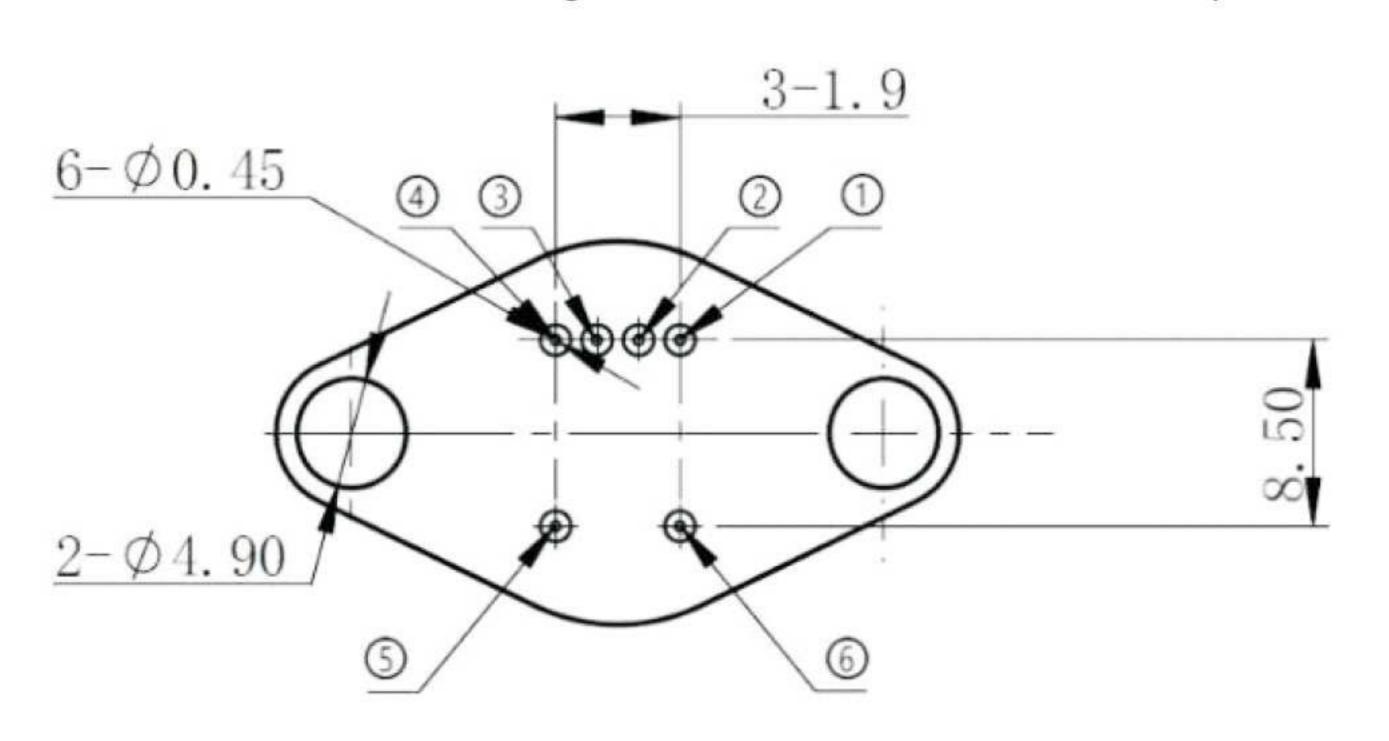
mechanical dimension 1 (Unmarked tolerance±0.1mm)
